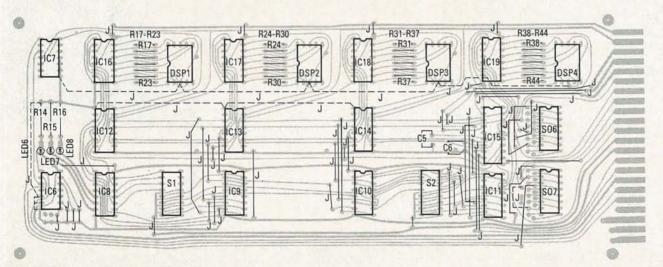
DISPLAY BOARD COMPONENT-PLACEMENT DIAGRAM. Jumpers must be wired on both sides of this board. The solid lines represent jumpers mounted on the component side of the board; the dashed lines represent jumpers mounted on the foil side.
